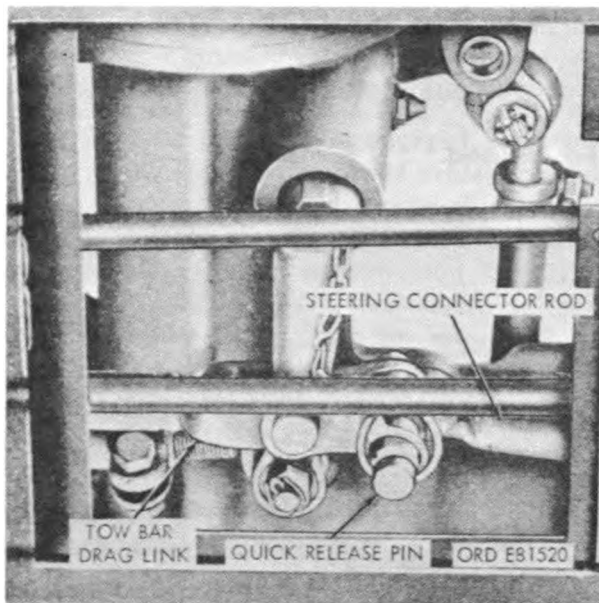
Steering access lid removed showing four-wheel steering connected.
